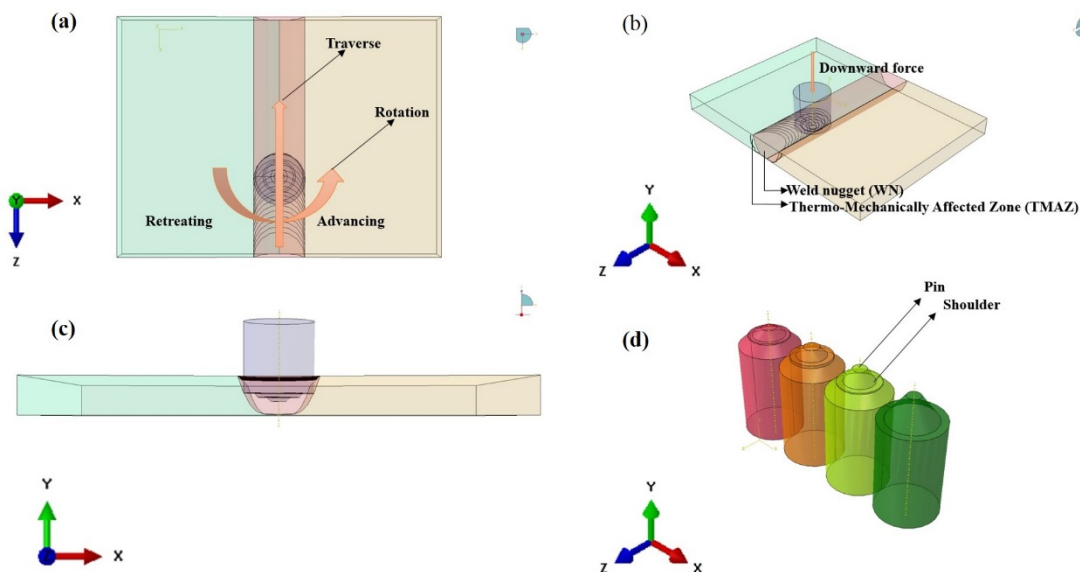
FSW and tool schematics. (a) Top; (b) side; (c) front; (d) tool designs. Images not to scale.
